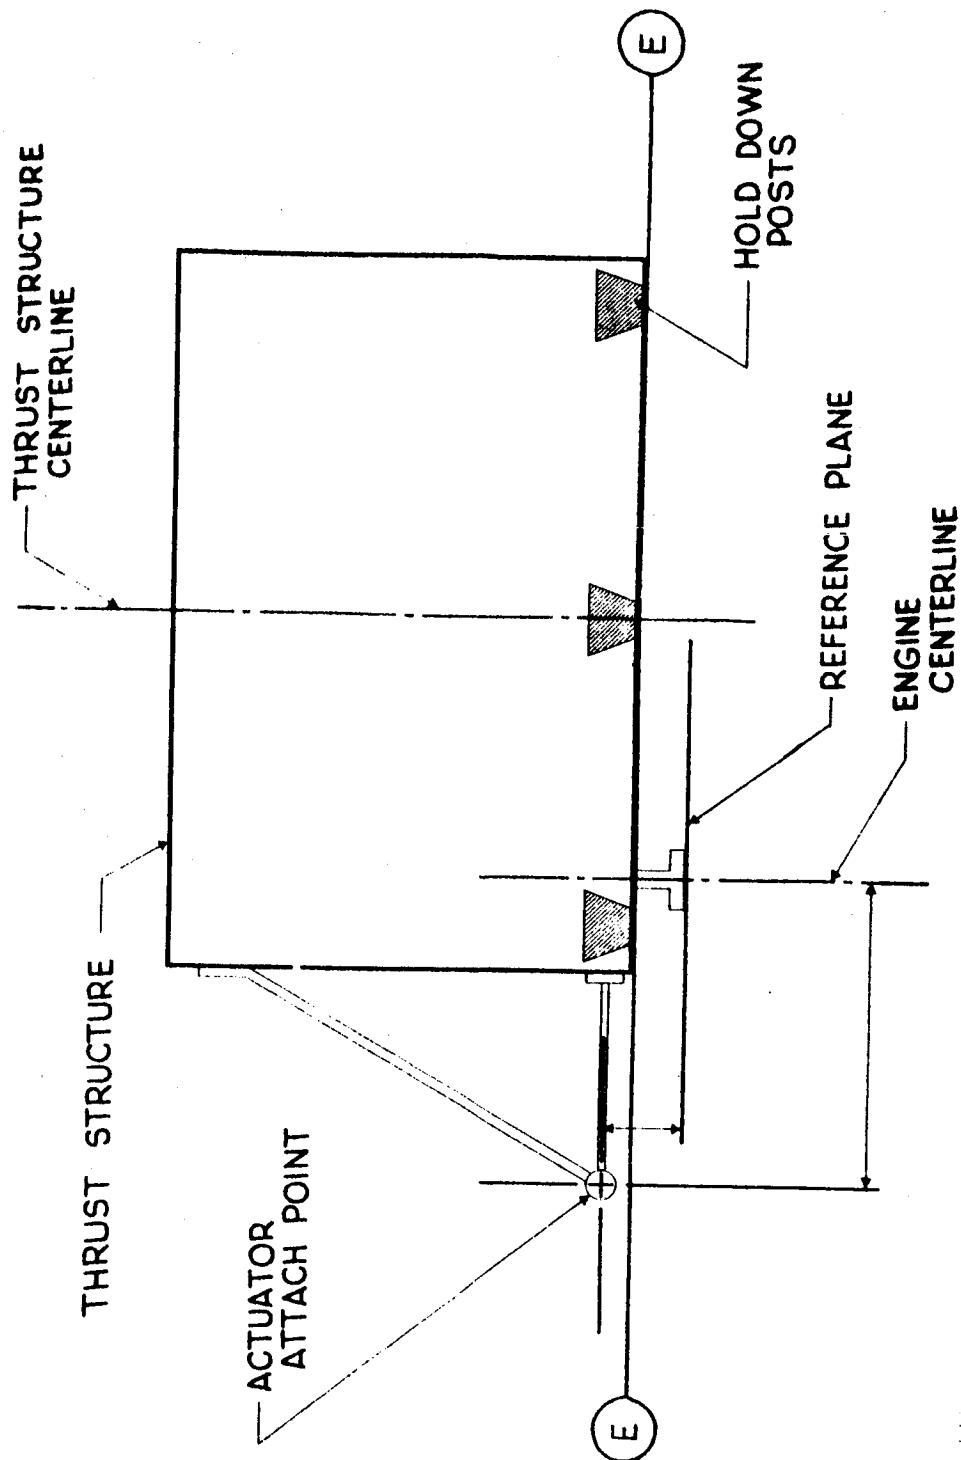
THRUST STRUCTURE ASSEMBLY
